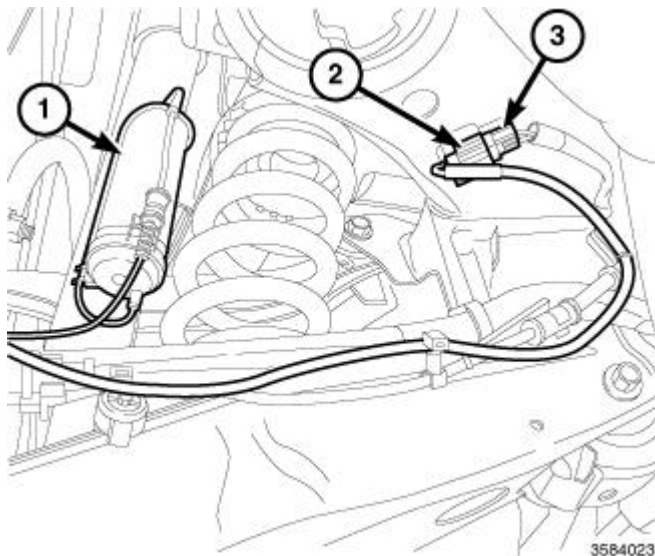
Shock Solenoid Assembly & ADS Harness Connector
